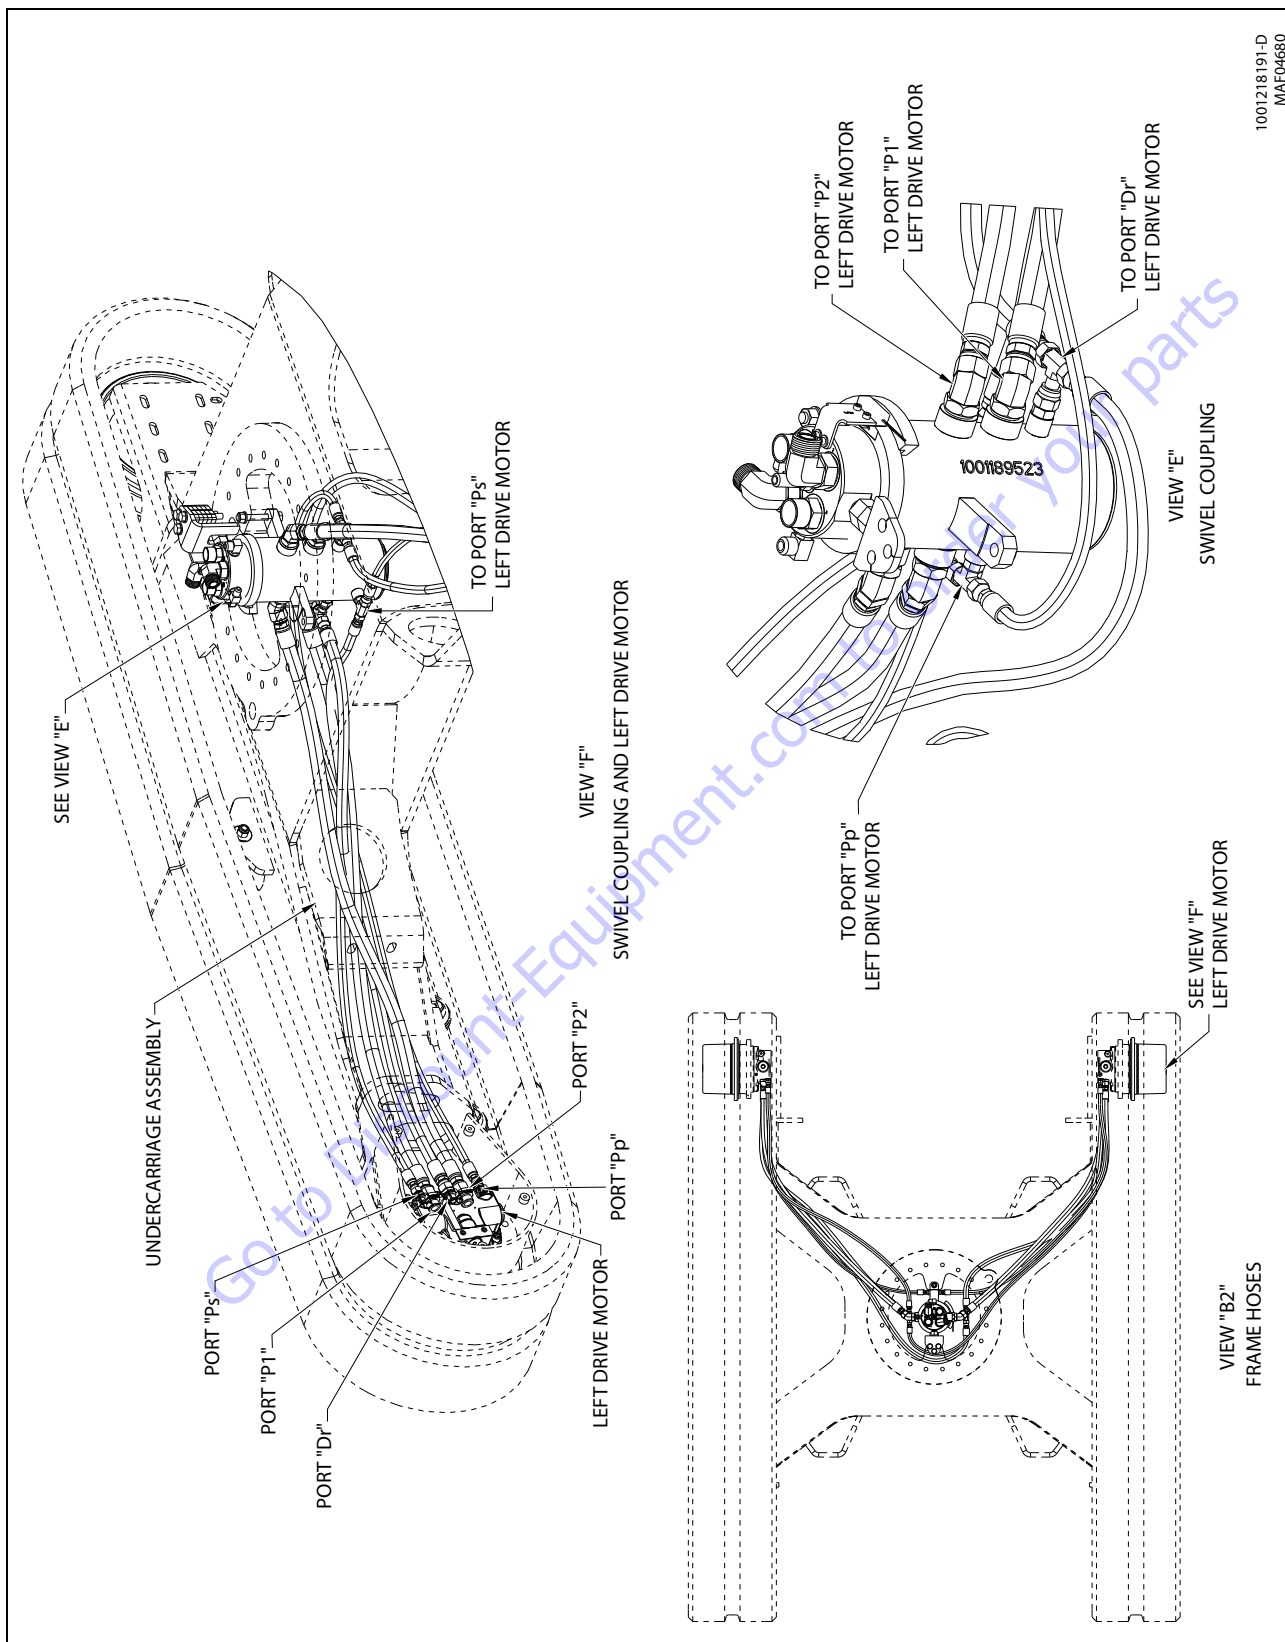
Hydraulic System Installation (4605JC) - Sheet 7 of 15
